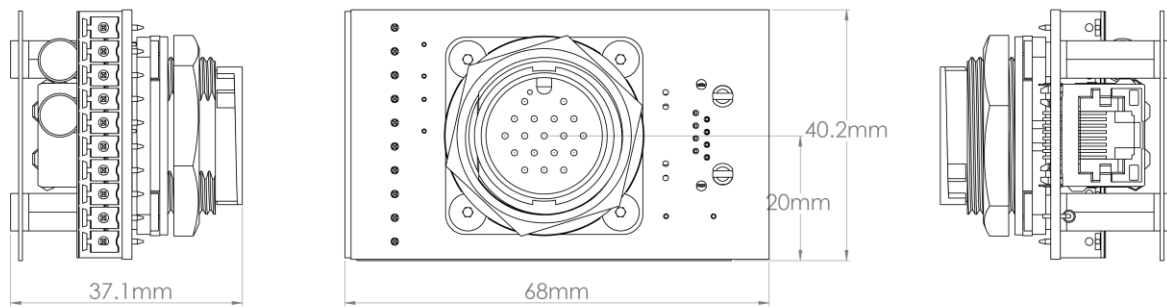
Patch Board Mk1 Dimensions (mm)
